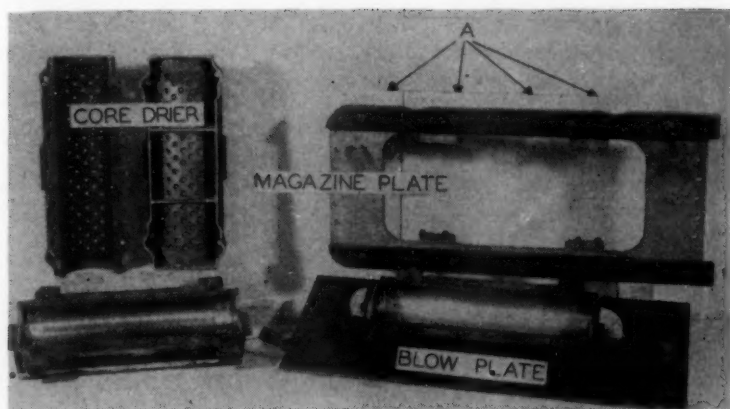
VIEW OF CYLINDER LINER CORE BOX MOUNTED ON BLOW PLATE AND MAGAZINE PLATE WITH SLOTTED FLANGES FOR HOLDING BLOW PLATE IN POSITION.
